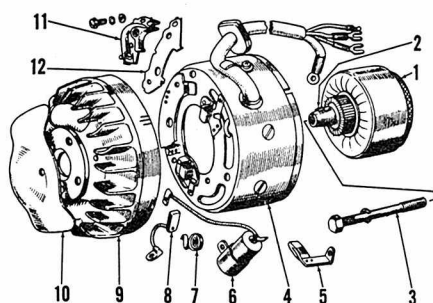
Exploded view of flywheel magneto used on standard models. Lighting coil (2) charges battery via a selenium rectifier.
